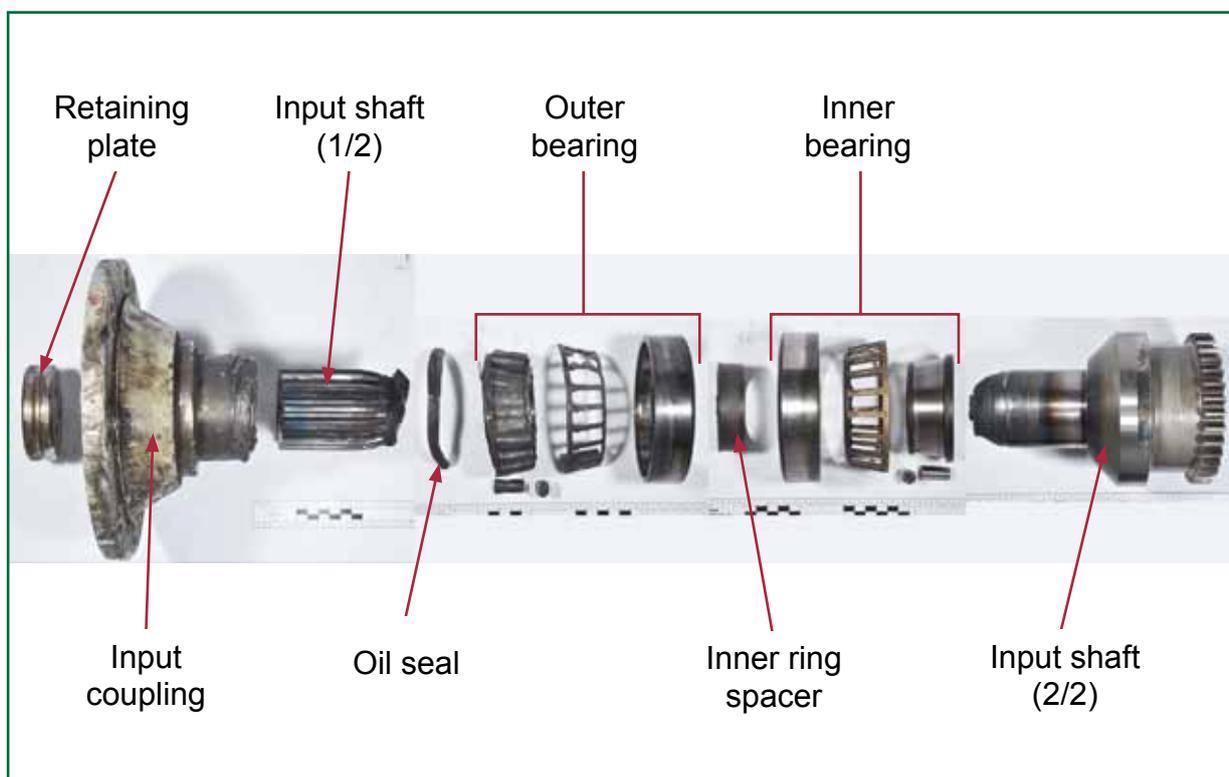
Components of the drive shaft input assembly following failure of the shaft
